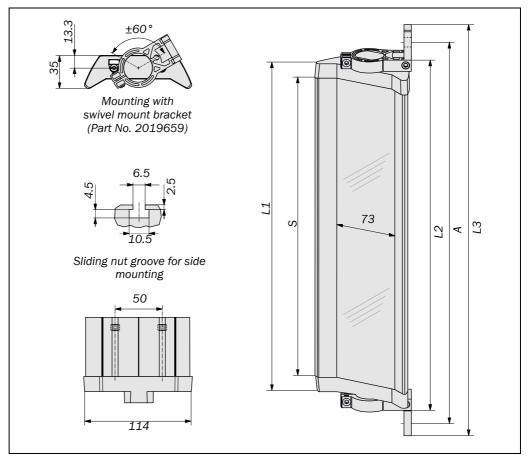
Dimensional drawing C-Fix-Flex bracket, pivoting (mm)
